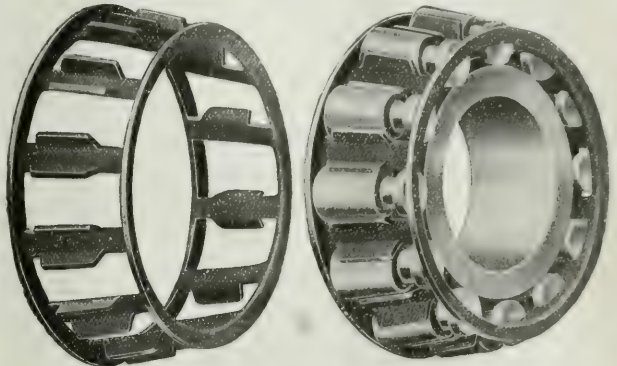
STEEL CAGE OF "TIMKEN" BEARING. FIG. 2.—"TIMKEN" ROLLER BEARING.
